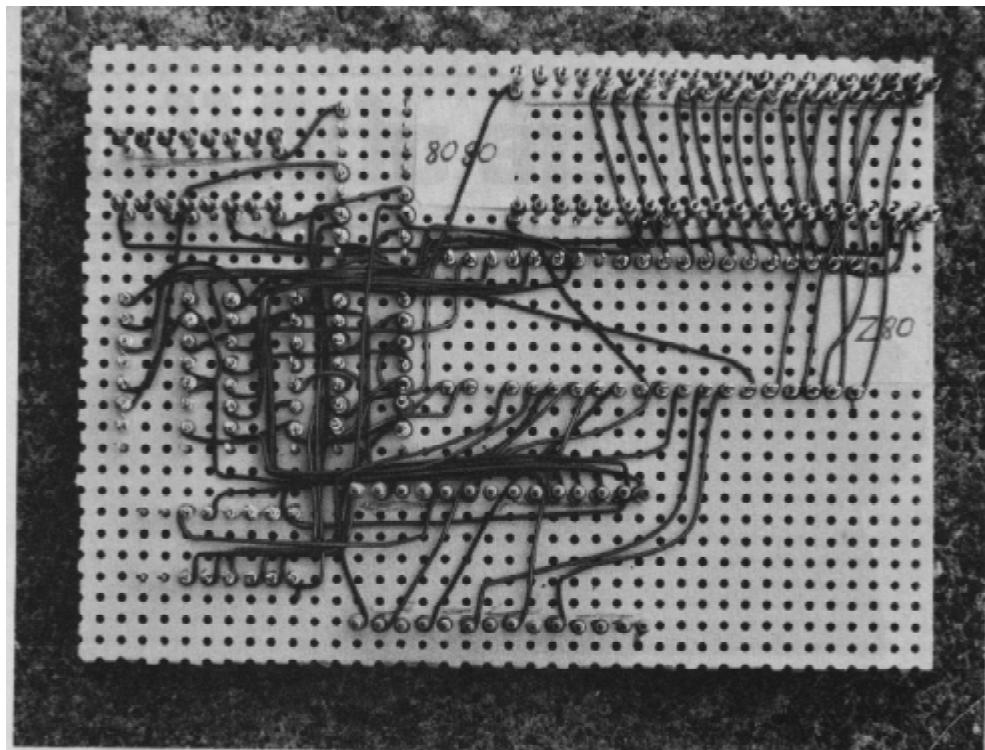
Bottom view of the adapter showing wire-wrap technique.
